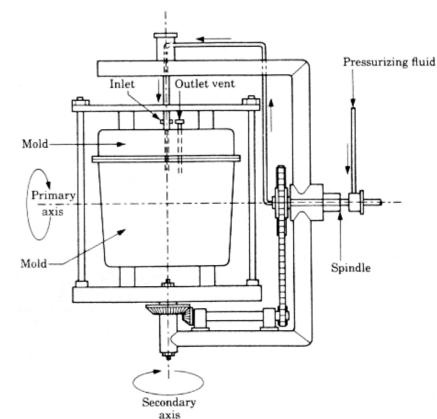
Rotational molding (rotomolding) process. Large tanks, buckets, and plastic footballs can be made by this process.
